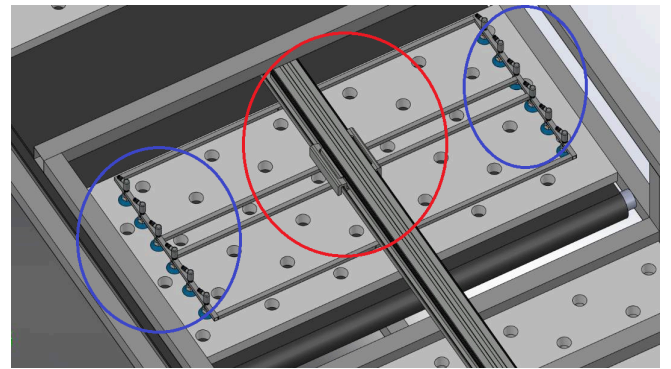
Cylinder and suction grips used for the de-stacking process.
